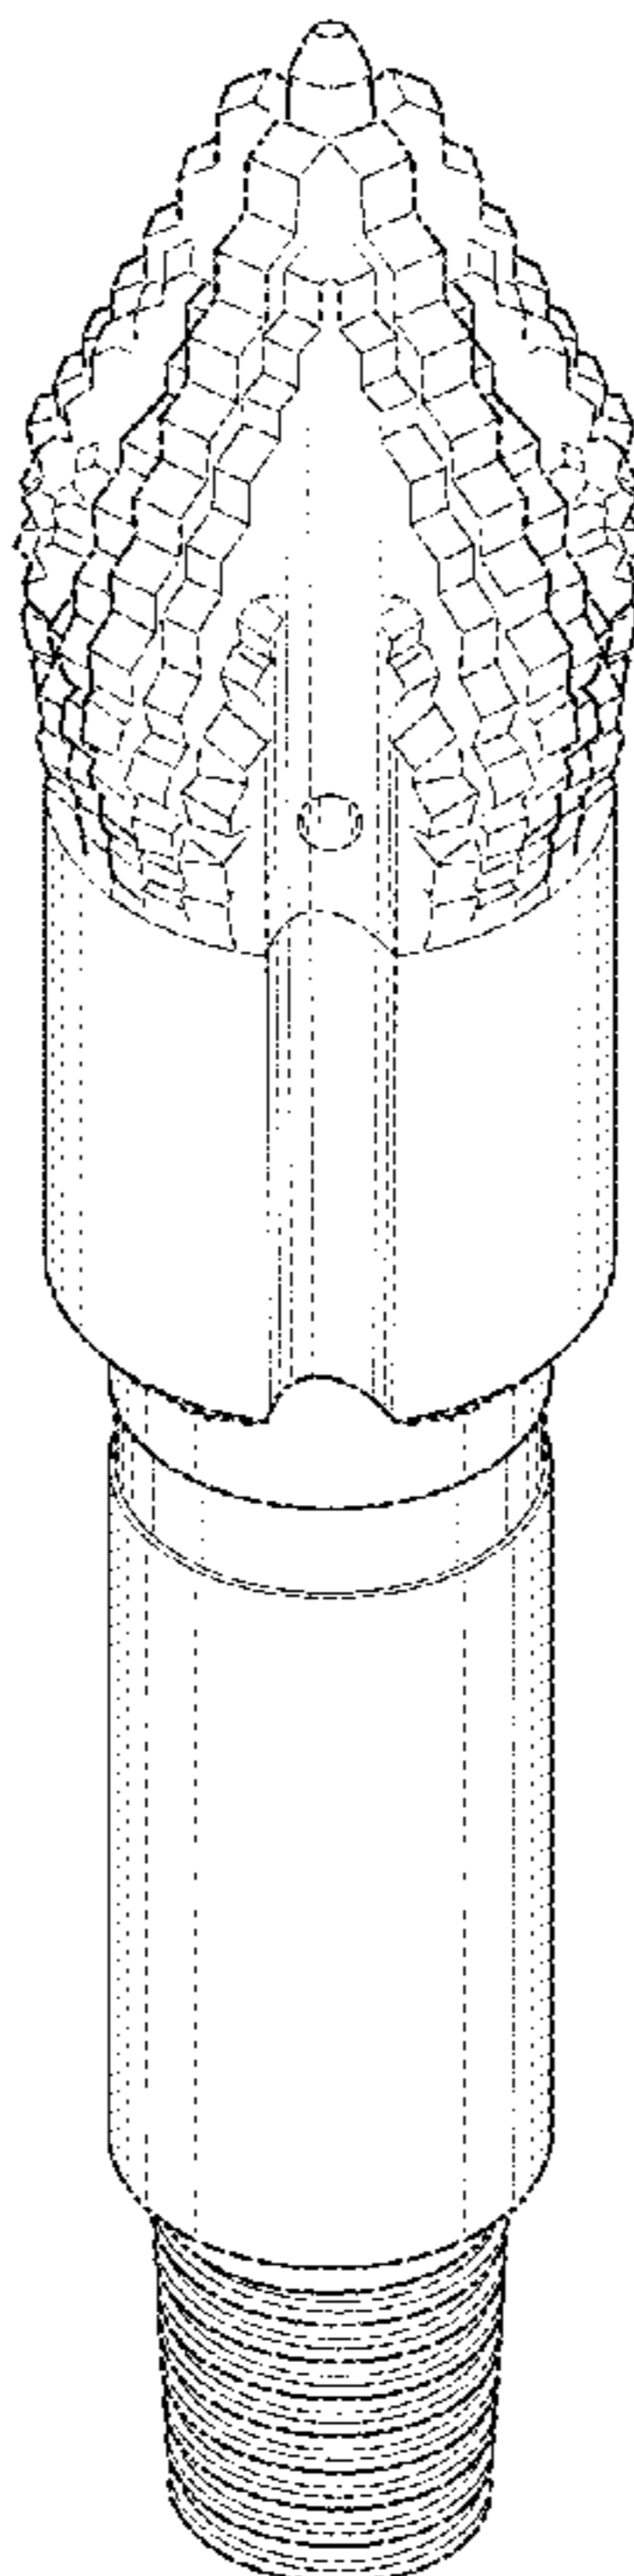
is an alternate side view of a milling tool depicted in FIGS. 1 through 4, rotated about a vertical axis from the view depicted in FIG. 4.
